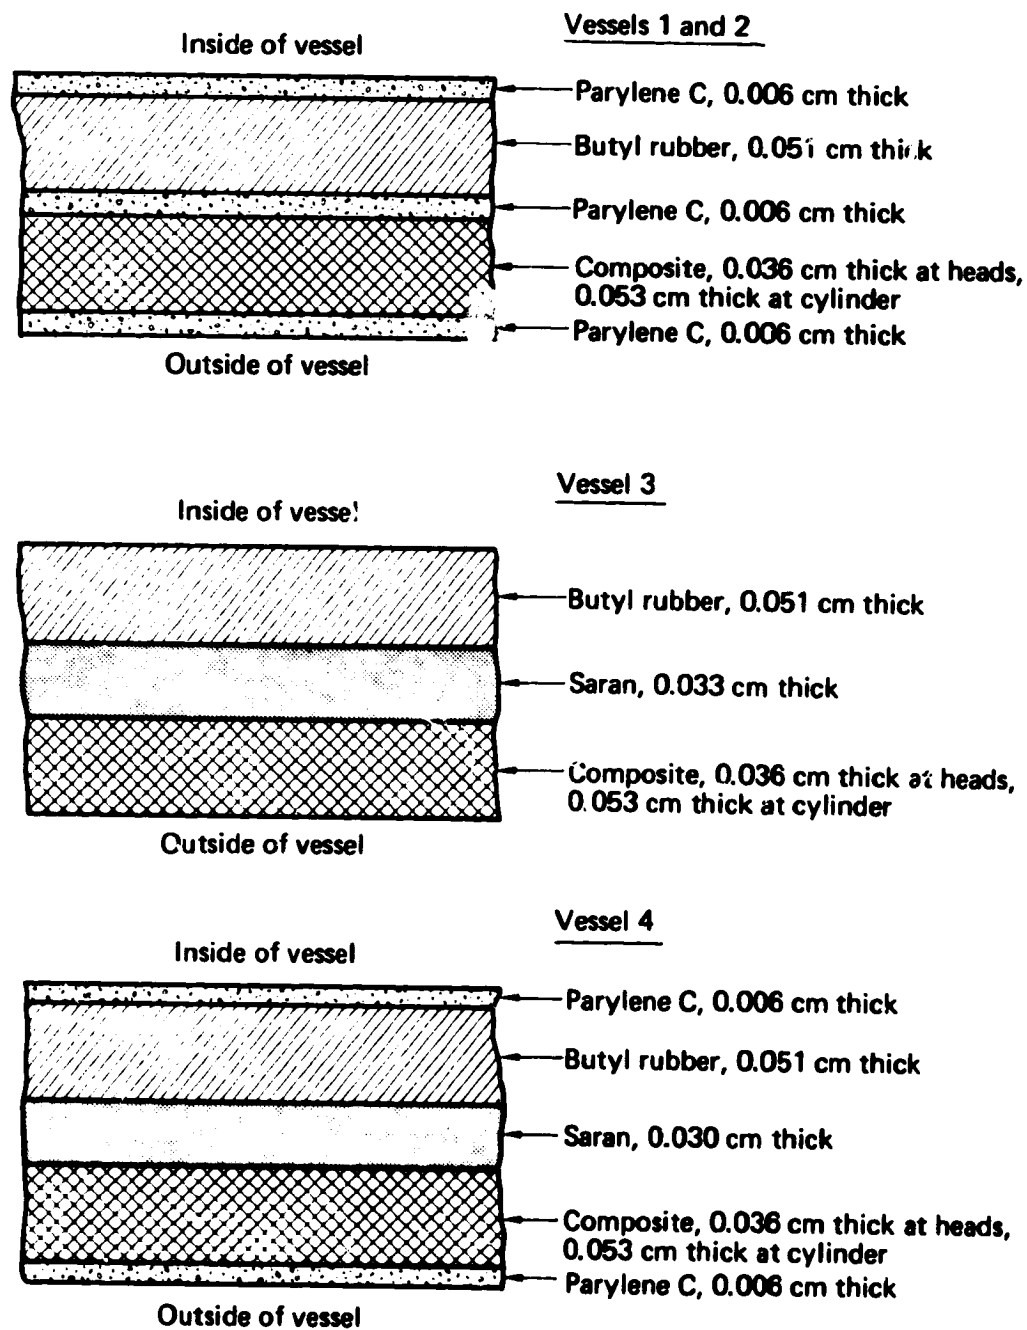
Wall cross sections of four vessels tested showing the dimensions of the various coatings used.
